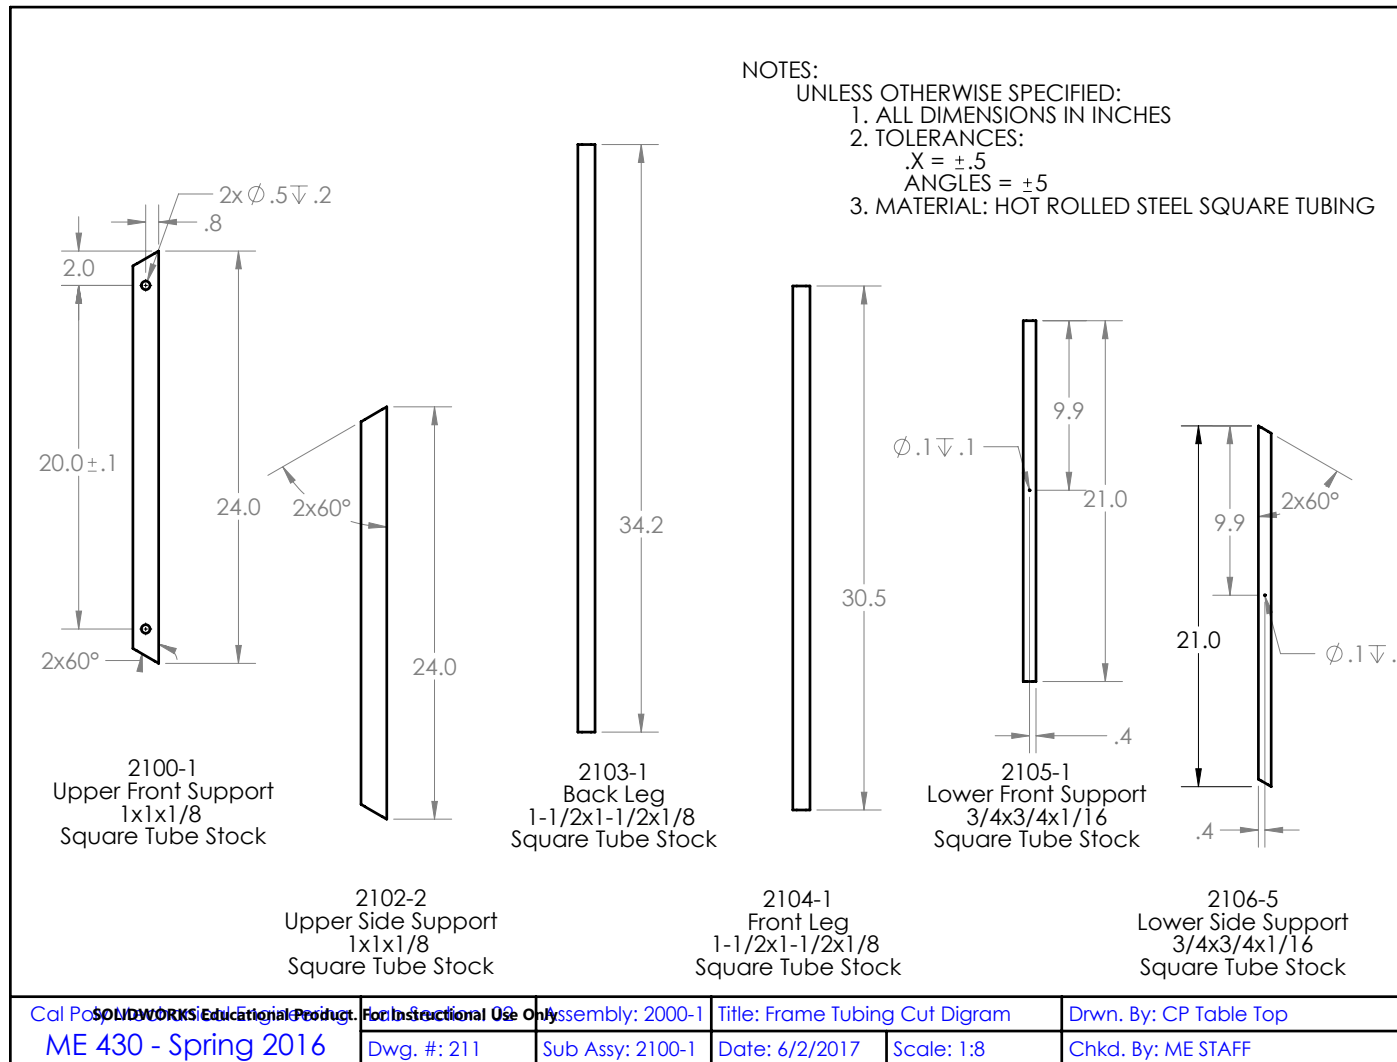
Drawing 211 - Frame Tubing Cut Drawing
